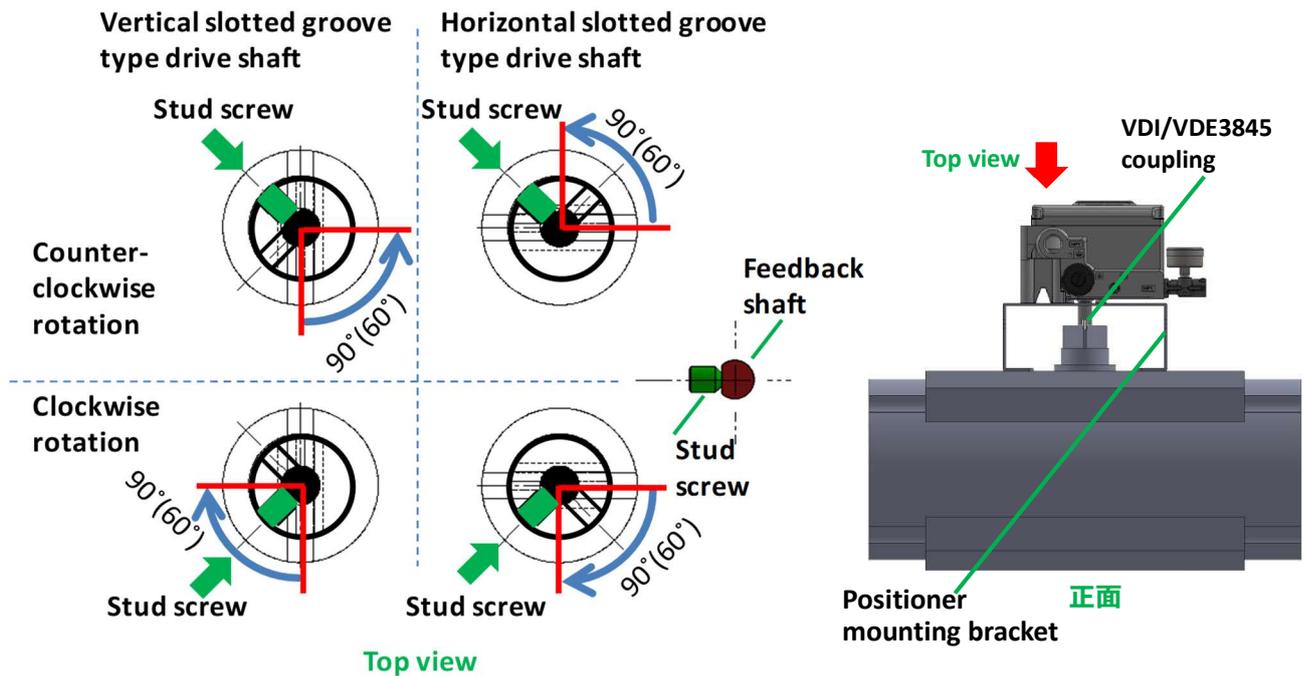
Example of NAMUR mounting to rotary motion actuator
